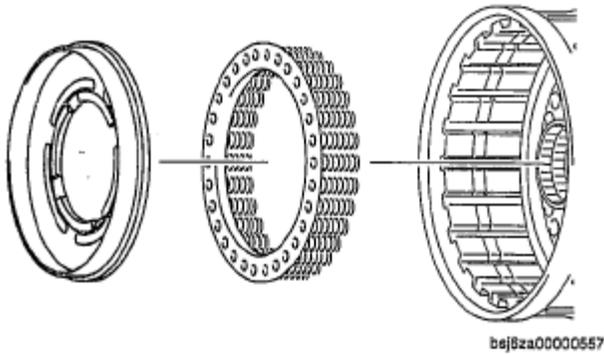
Identifying Seal Plate And C2 Clutch Piston Return Spring
